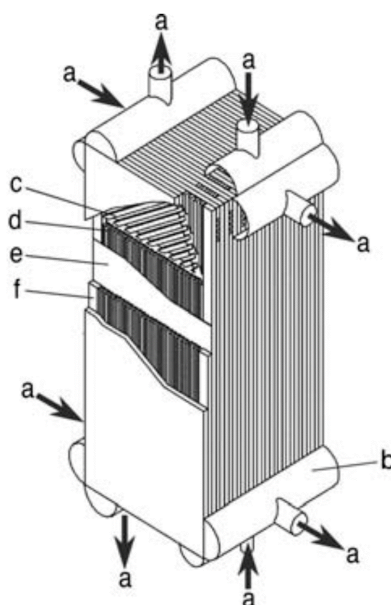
Schematic drawing of an brazed plate-fin heat exchanger. Courtesy of Linde AG;ⁱ
